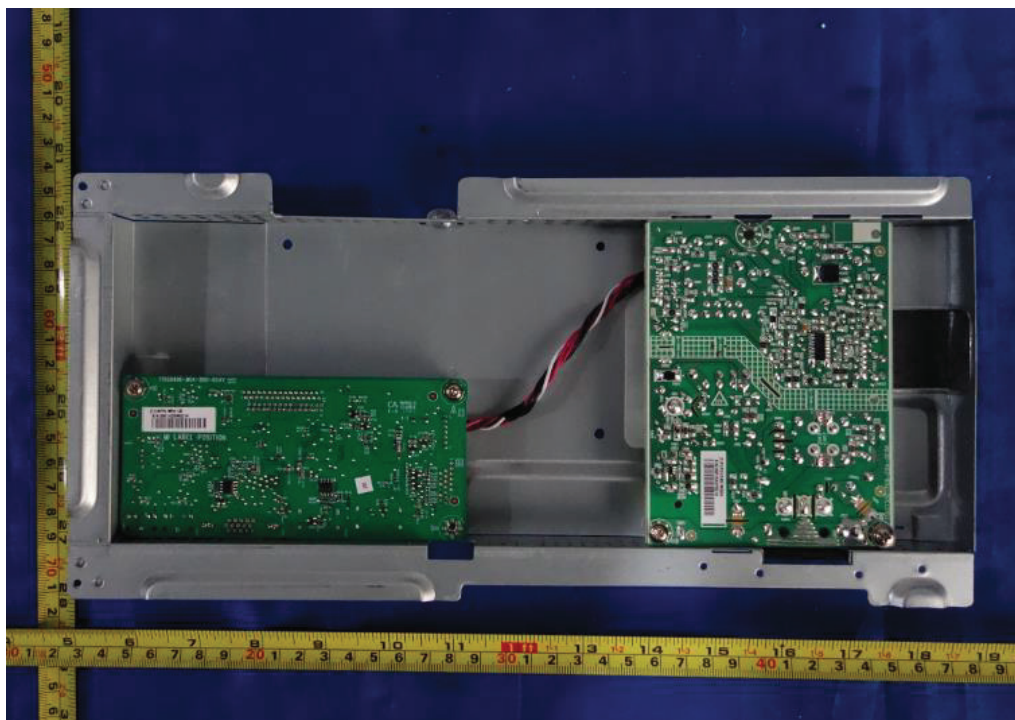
Metal enclosure type A with power board 715G7300 and main board 715G9496
